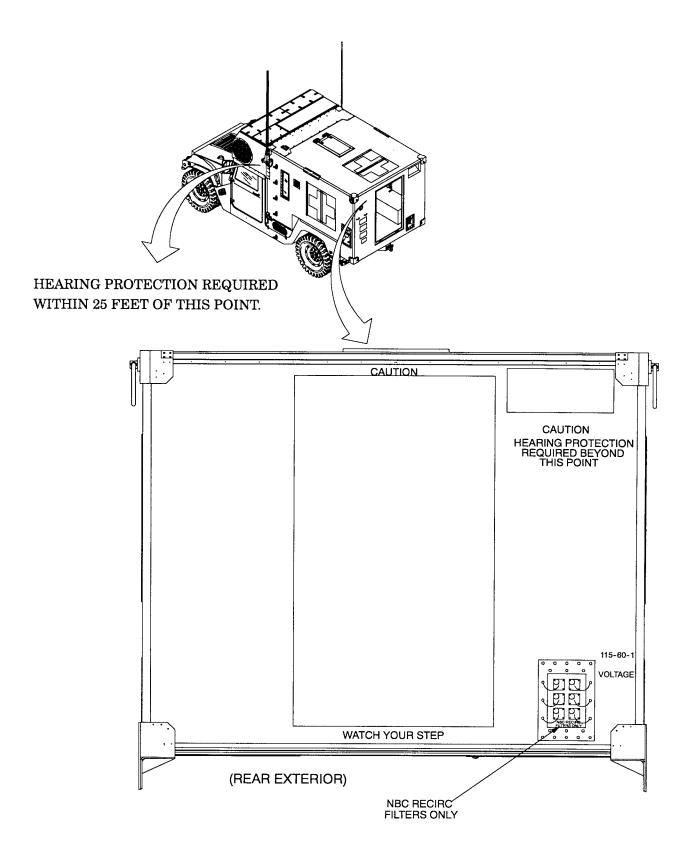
Decals and Instruction Plates (Sheet 10 of 10)
